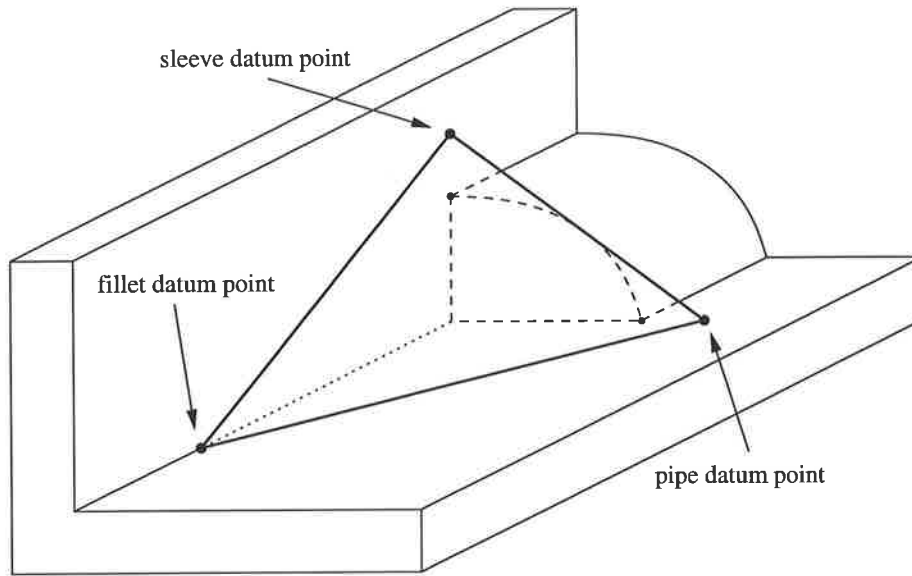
Heat source datum plane for circumferential fillet welding.
